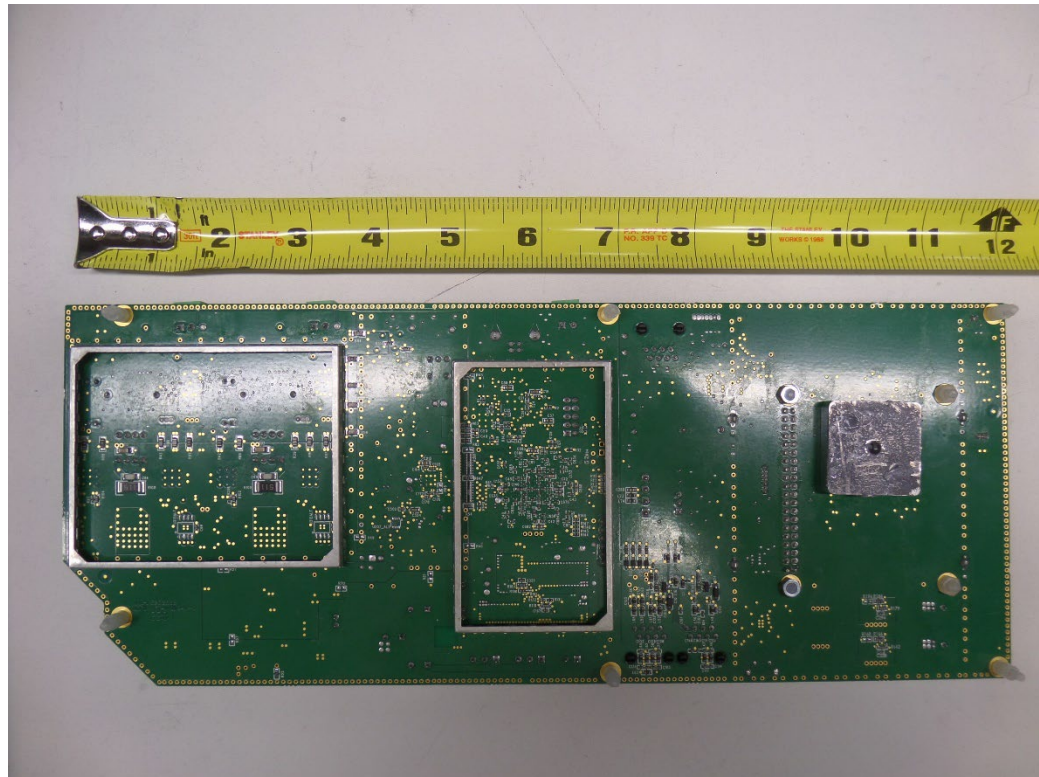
NG12 PRI/PAB RF PED EAS RF BOARD BOTOM SIDE WITHOUT SHIELDS
